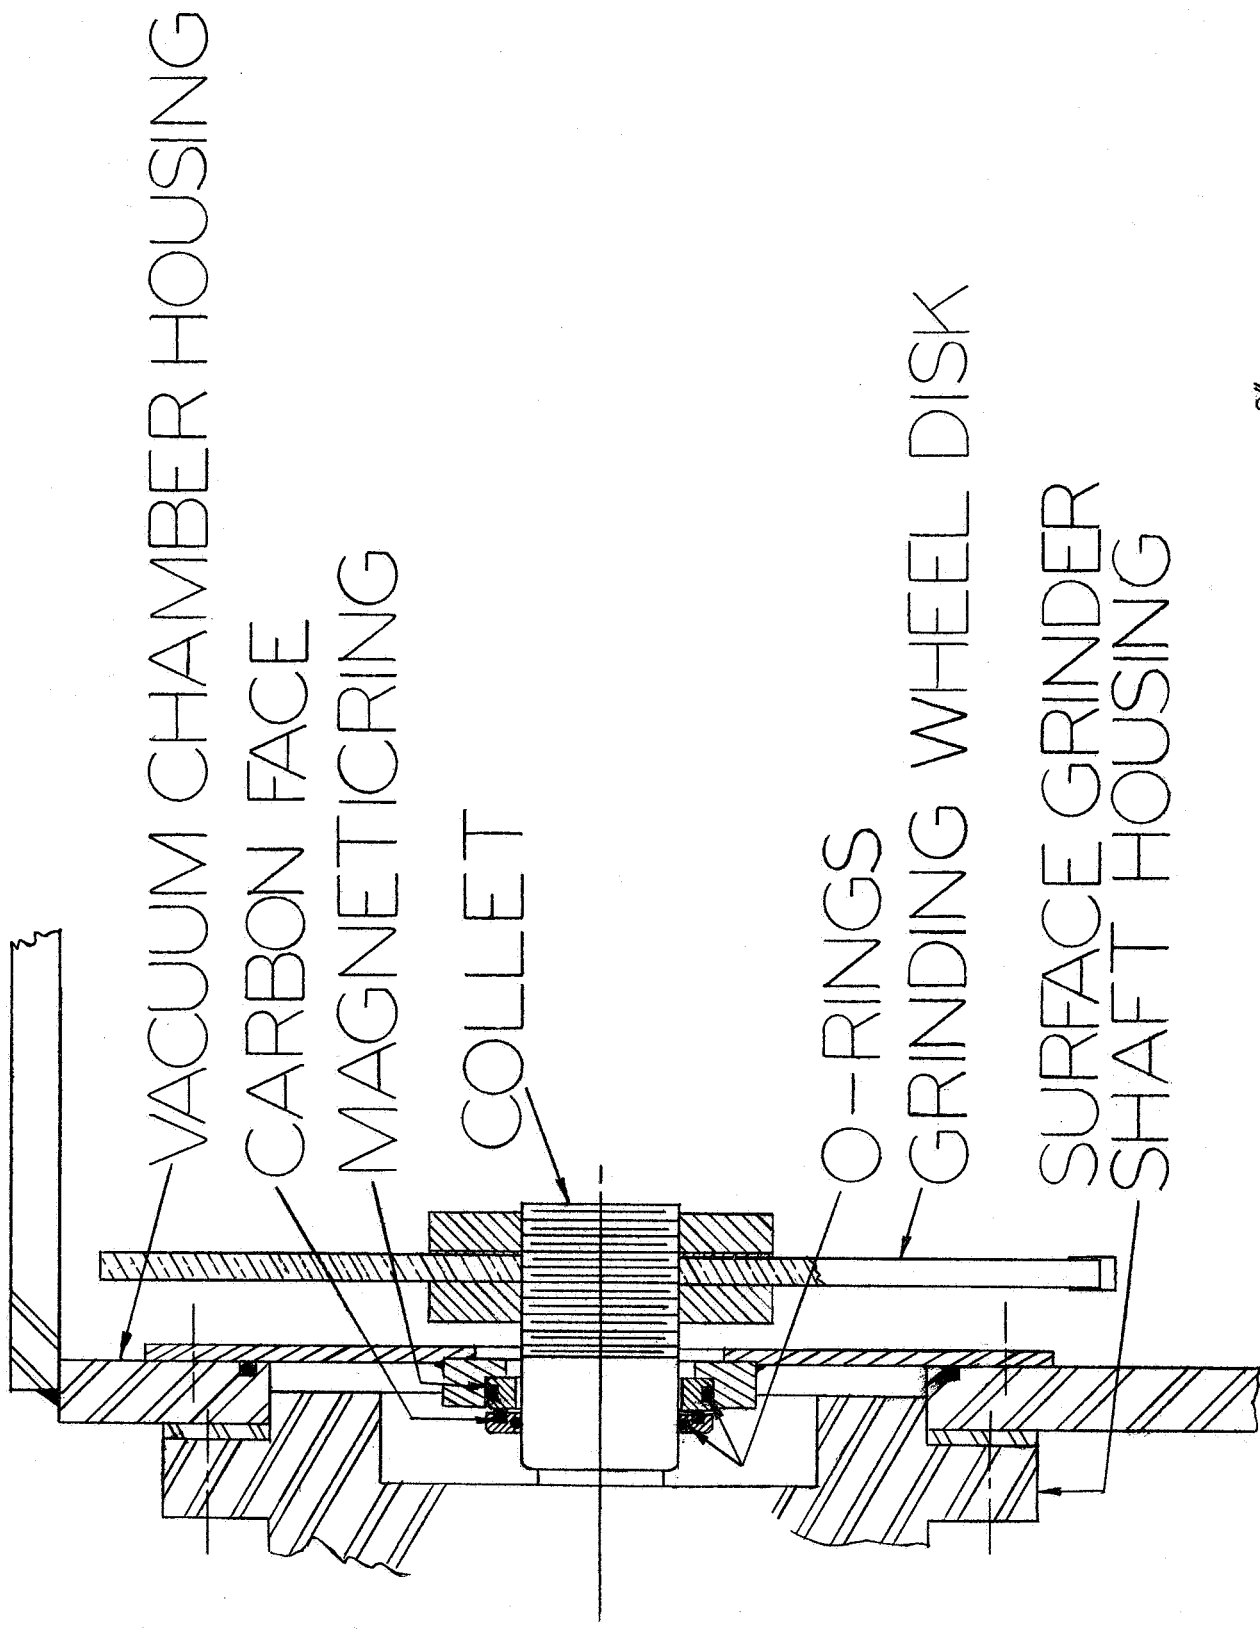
FRONT VIEW OF VACUUM CHAMBER
